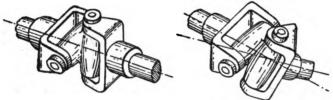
TYPICAL UNIVERSAL JOINT.
